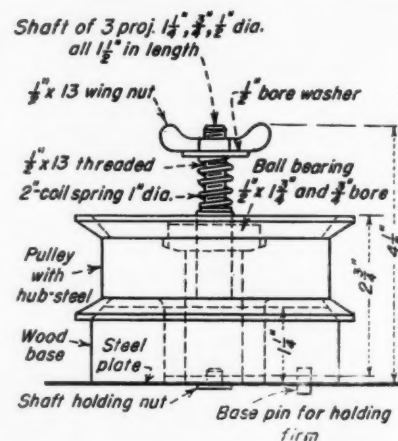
Clutch type tension device assembly showing all component parts of the unit; also pertinent dimensions.
